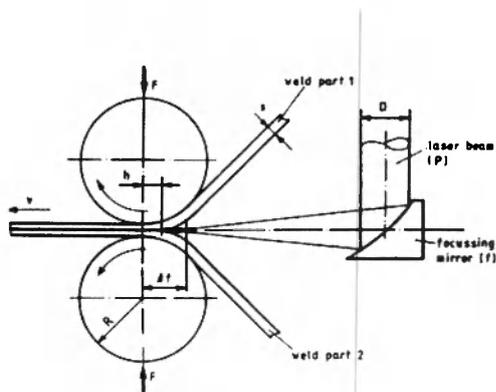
Schematic diagram of laser pressure welding of sheets
